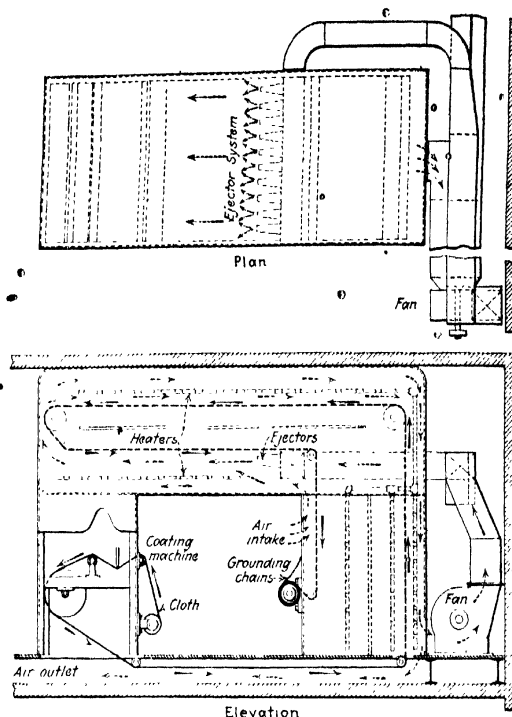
PLAN AND ELEVATION OF DRYING EQUIPMENT FOR PYROXYLIN COATING MACHINES
